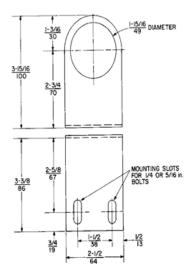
A-4000-143 Mounting Bracket Dimensions, in./mm
